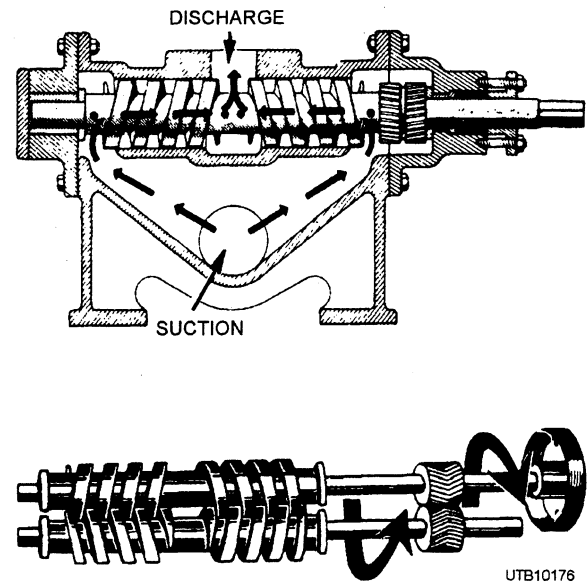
Positive displacement, double-screw, low-pitch pump
